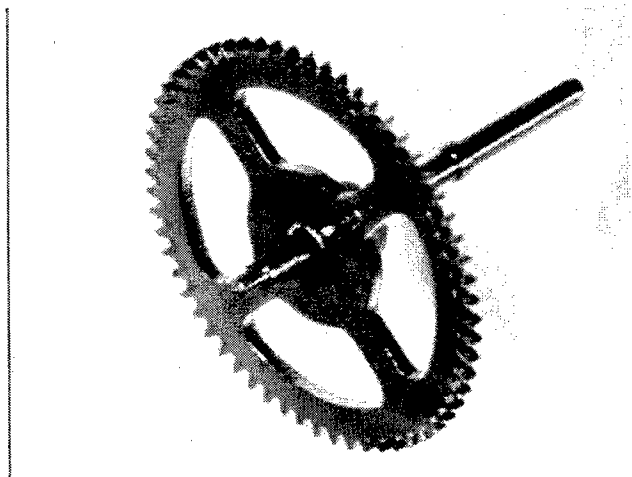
Welding with conventional pulsed Nd:YAG laser
